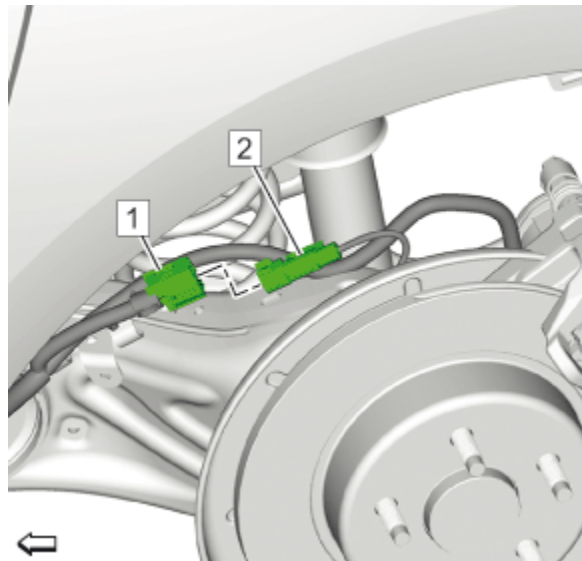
Wiring Harness Rear Wheel Speed Sensor
